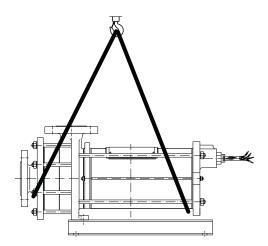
Fastening the lifting gear to the pump unit with base plate
